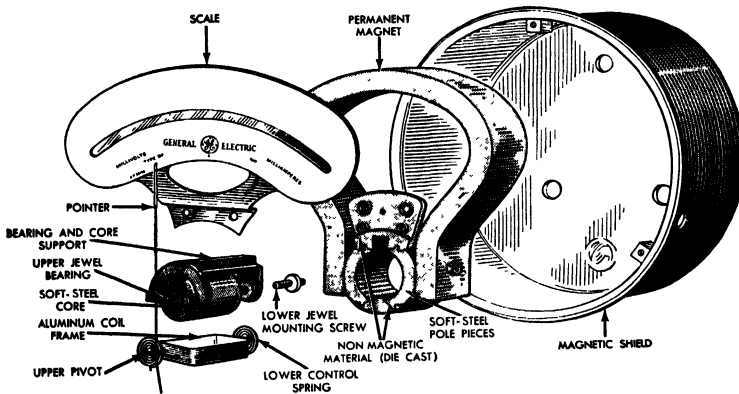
Disassembled Parts of a Typical Permanent-Magnet Moving-Coil Instrument.
